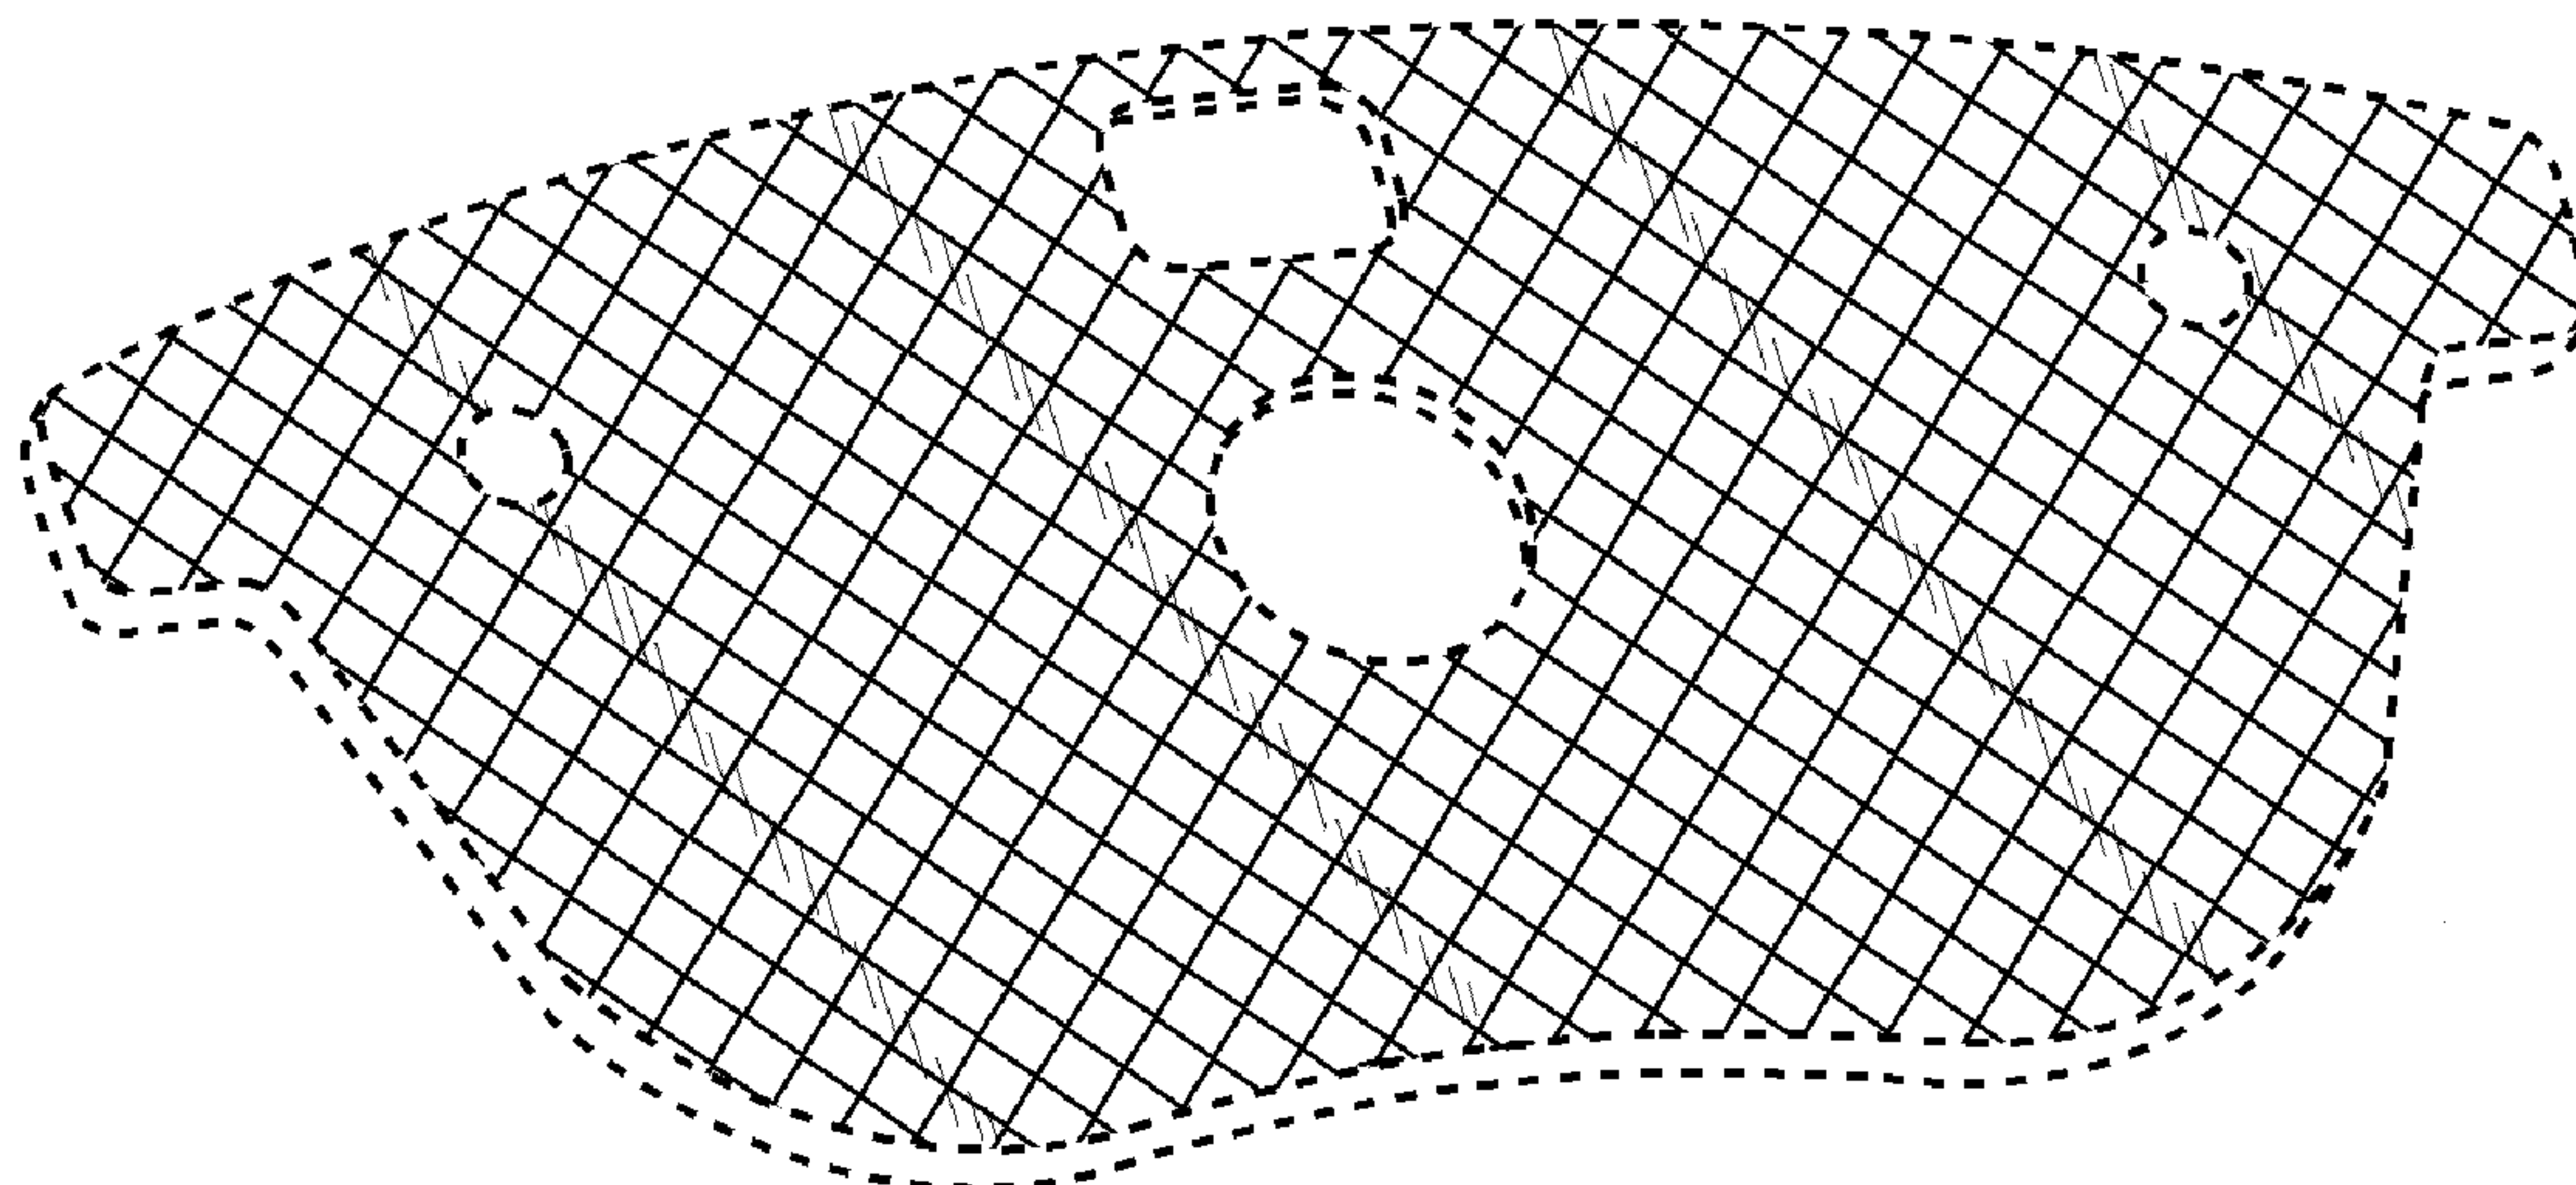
is a top perspective view of another embodiment of the present brake shim surface;
